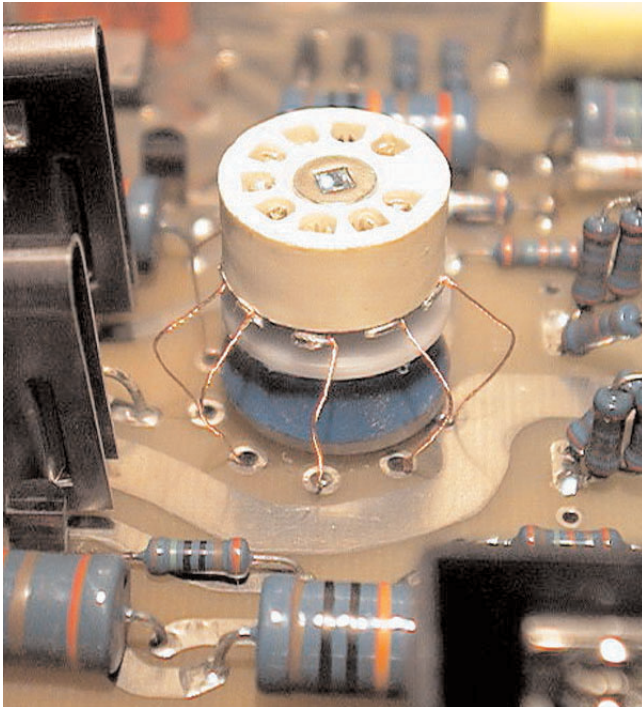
Here the Iso-socket is shown correctly indexed and glued onto the PCB substrate. The tinned leads have been looped and are ready for soldering to the PCB's pads. ([Go back to Fig. 14](#))
